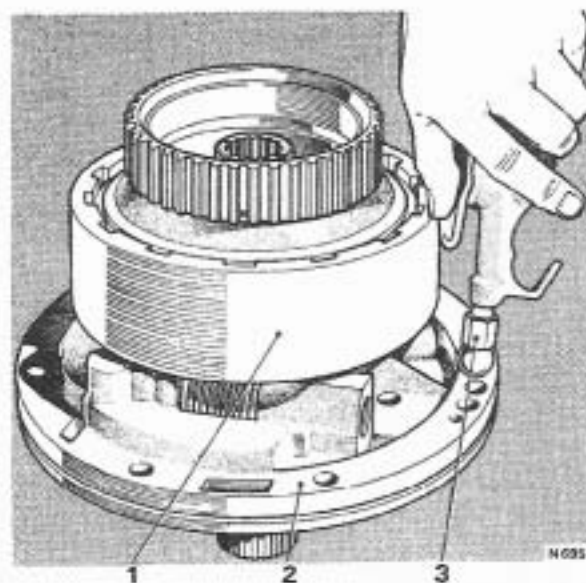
AIR TESTING THE FORWARD CLUTCH
